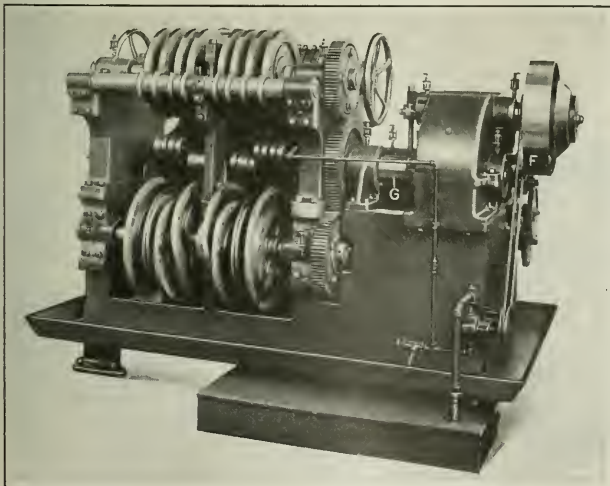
Rear View of Crankshaft-cheek Turning Lathe showing Location of Master Cams
